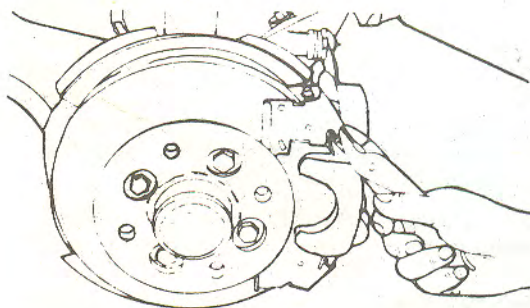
Removal of the spring clips when replacing the brake pads on the front disc brake.
